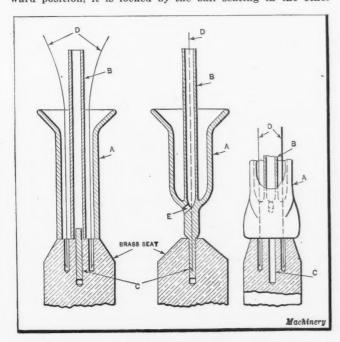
Diagrammatic Views, showing Relative Position of the Lamp Parts before and after assembling
